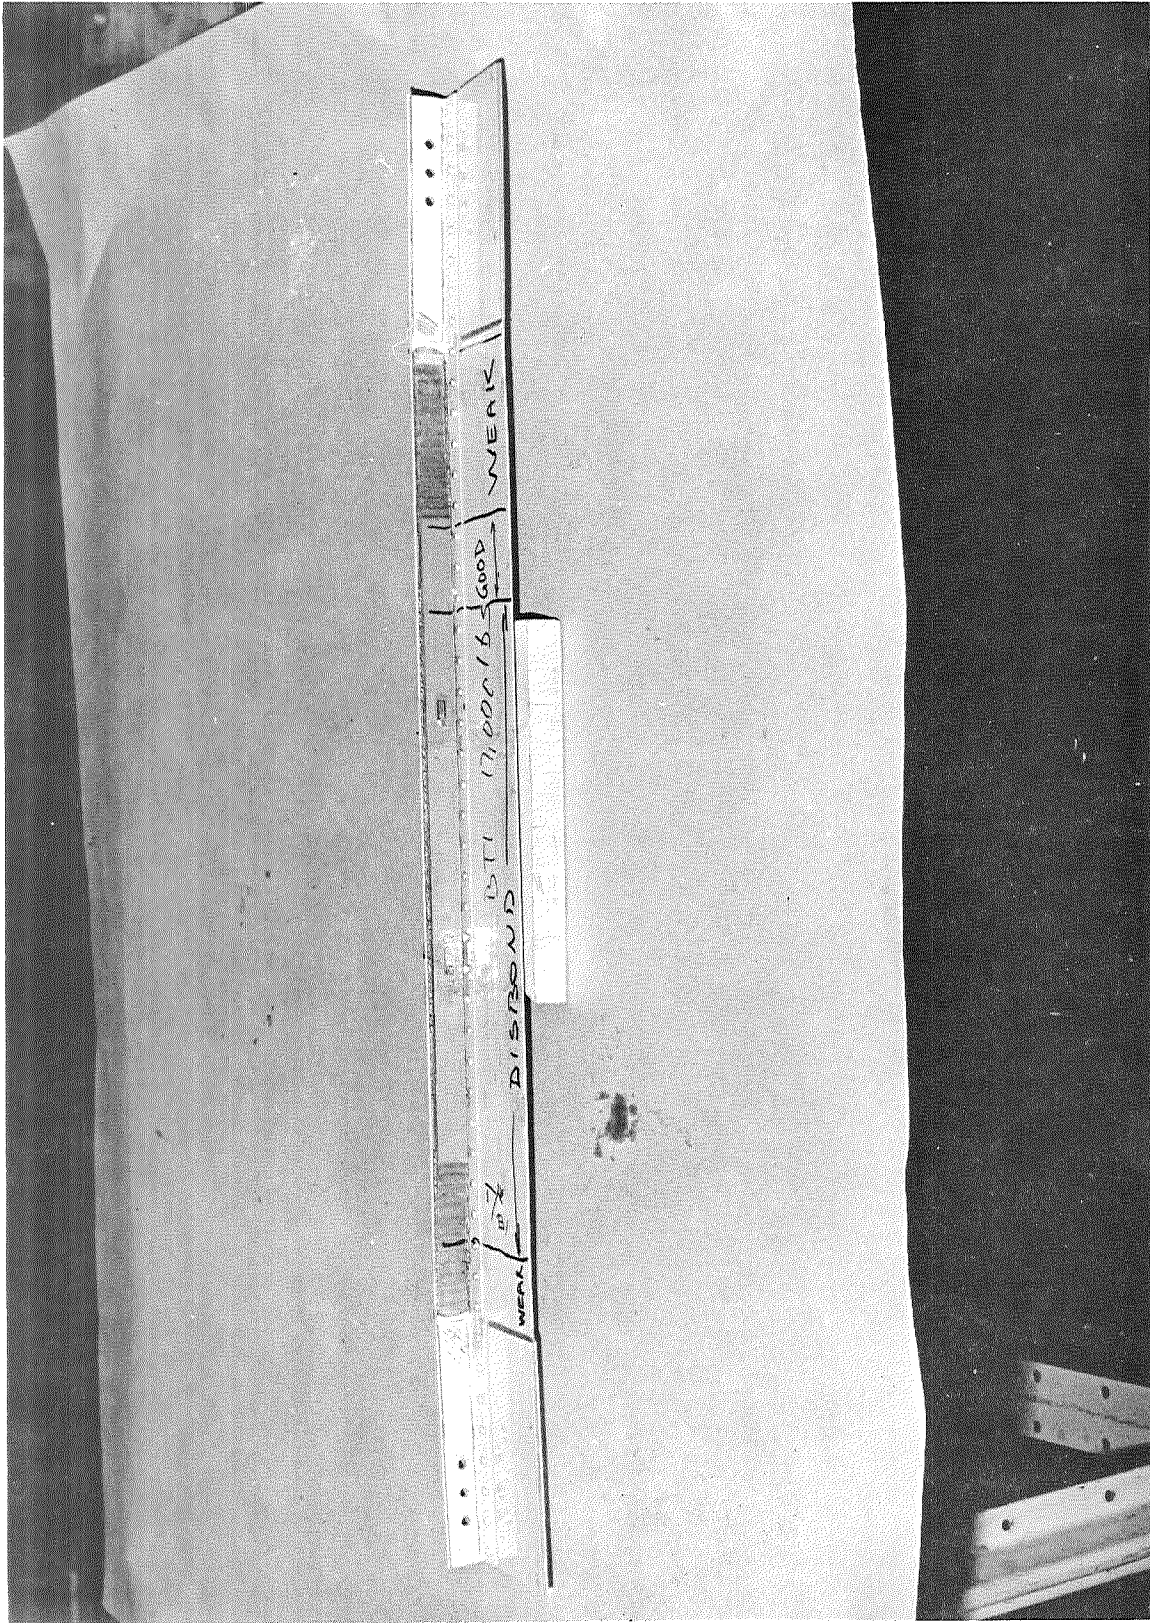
BOND FAILURE IN REINFORCED STRINGER TENSILE SPECIMEN.
